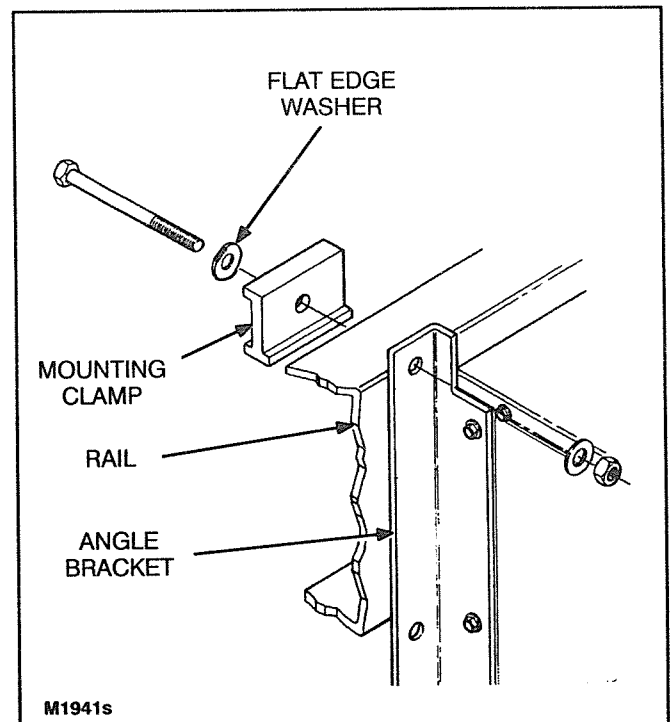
MOUNTING CLAMPS TO RAIL
